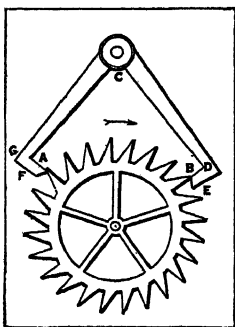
DEAD ESCAPEMENT, A REFINEMENT OF THE ANCHOR ESCAPEMENT
